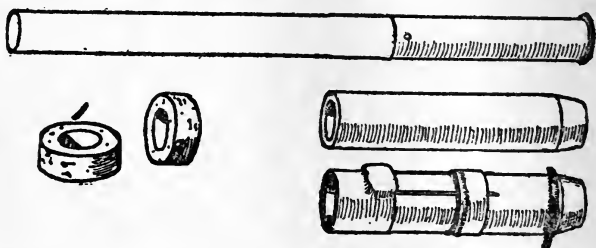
Ferrule Riveted on Wood Core of Handgrasp, Pine Sleeve Ready to Be Glued On, and Reelseat and Corks for Grasp.
